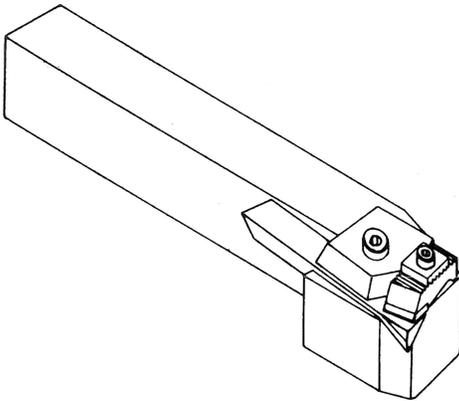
Everede BX-L tool holder with triangular tool bit and adjustable clamped chip breaker. (Courtesy Everede Tool Company, Chicago, Ill.)
